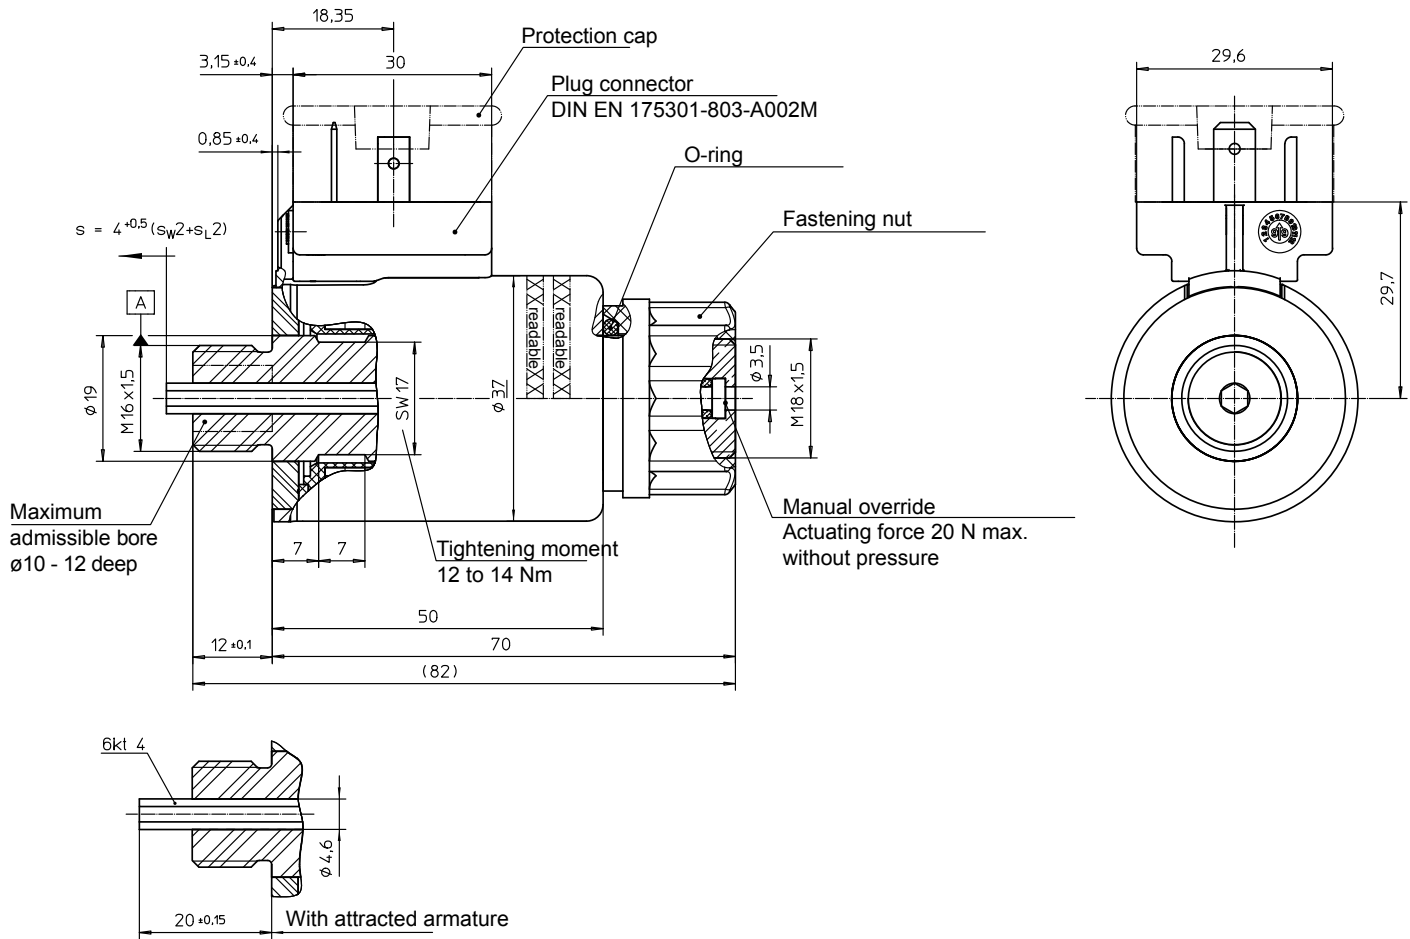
Dimensional drawing to Type G RC Y 037 N54 A01
